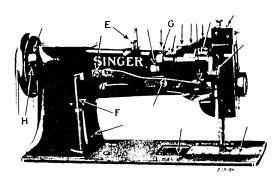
Rear View of Machine Showing Oiling Points and Adjustments
